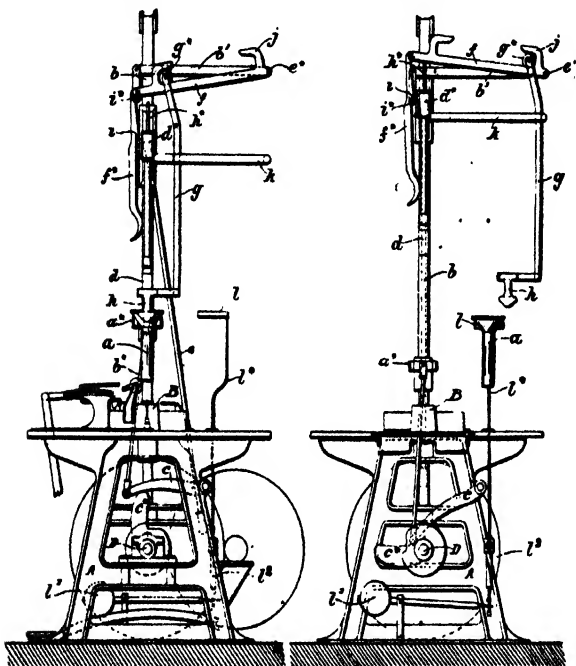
Tea Packing or Parcelling Machine (side elevation showing the funnel mechanism).
